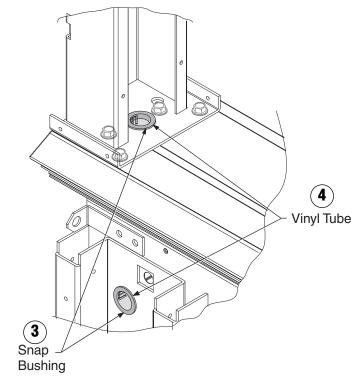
Snap Bushings and Vinyl Sleeve Tube
